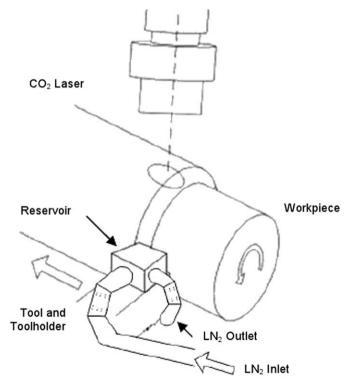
Schematic of hybrid machining experimental setup with CO_2 laser.
